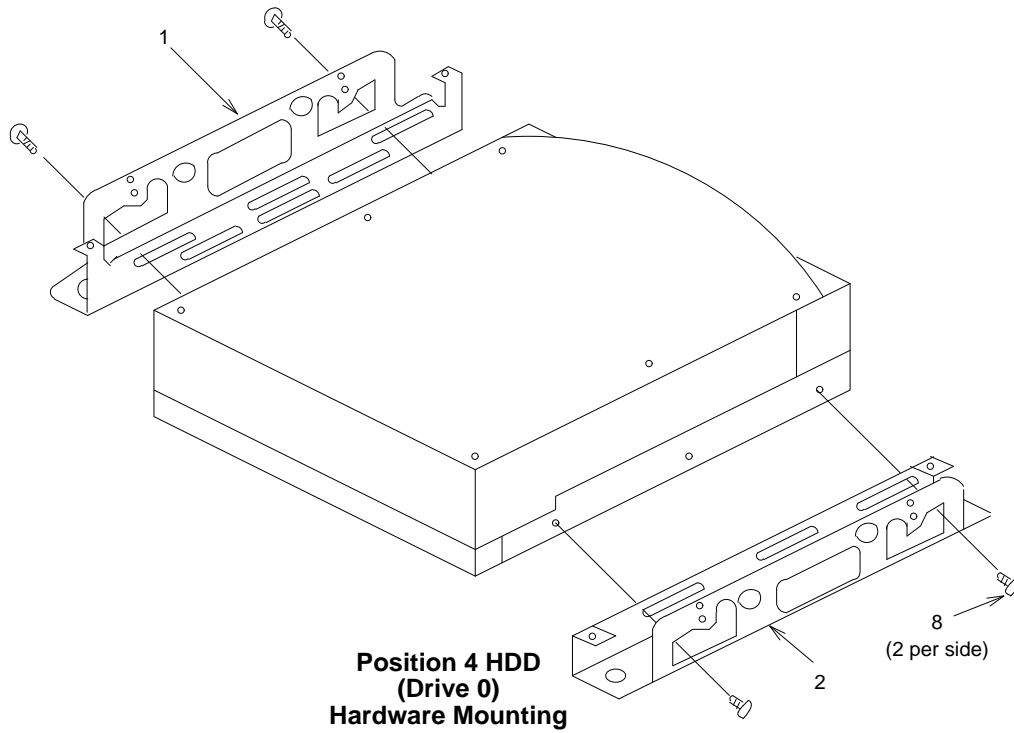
Position 4 Hard Disk Drive Mounting Kit
